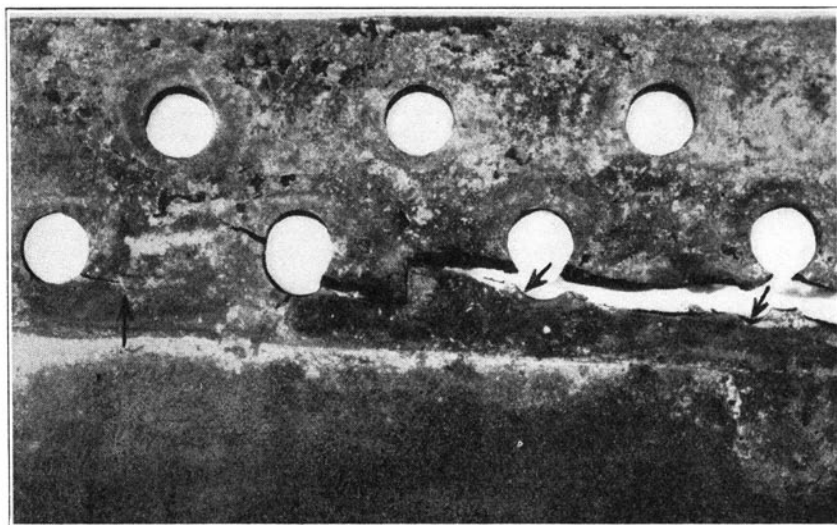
SECTION OF RUPTURED PLATE WHICH FAILED DUE TO EMBRITTLEMENT
